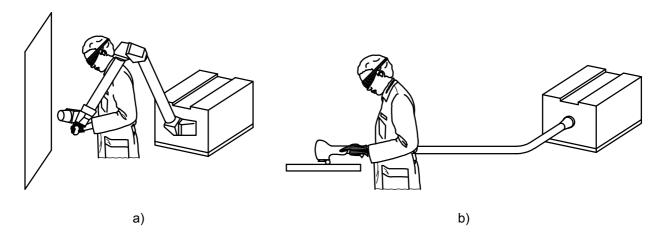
Hand-held handling system, manually positioned with or without motorized feed, laser device fixed, workpiece fixed
